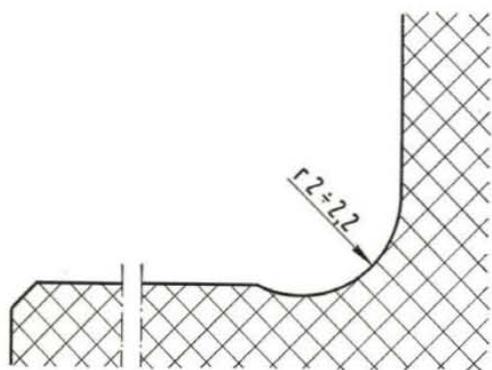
Fillet radii for flywheel end main bearing journal shoulder.
